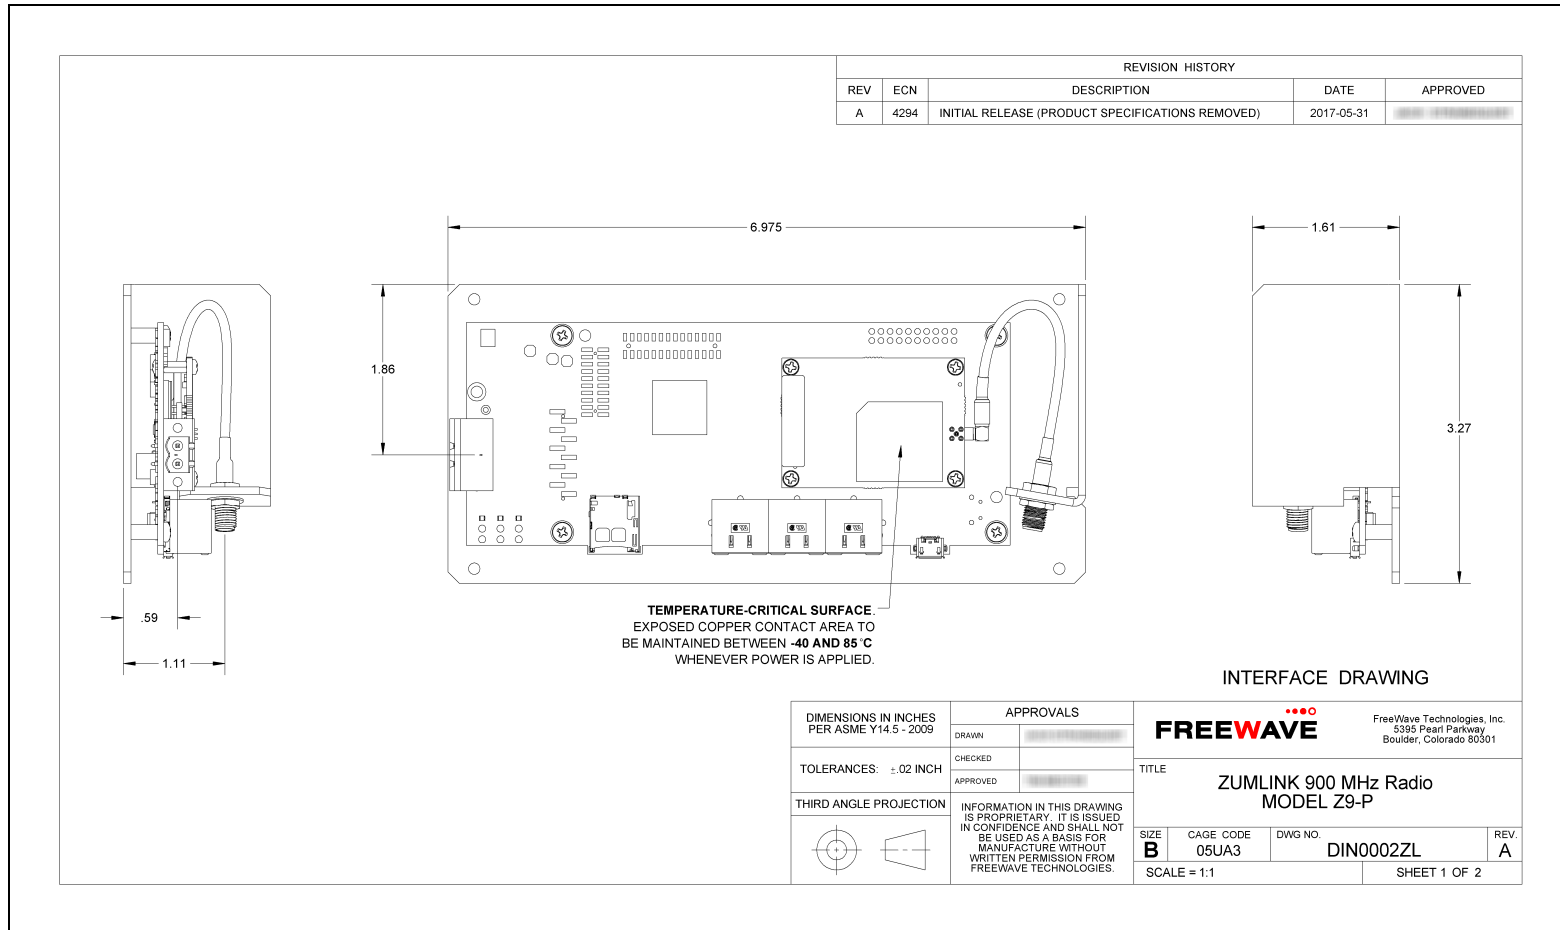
Z9-P Mechanical Drawing - Top and Sides
